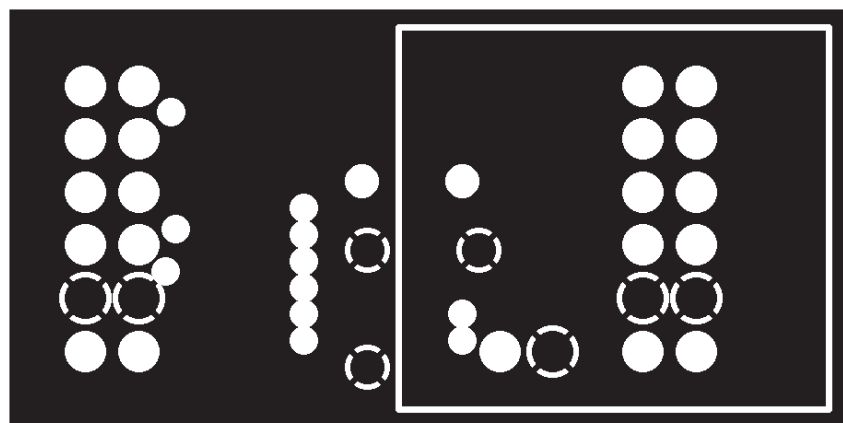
MAX14850PMB1 Peripheral Module PCB Layout—Inner Layer 1 (Ground)
